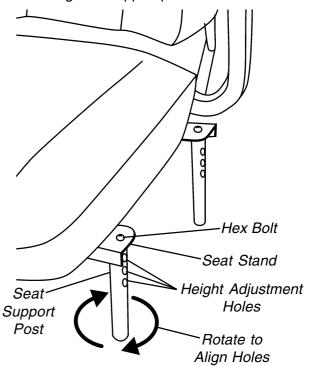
ADJUSTING THE SEAT SUPPORT POSTS
